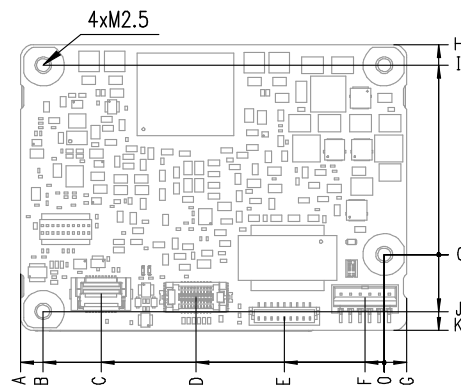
FETK-T4.0B Dimensions - Top View
